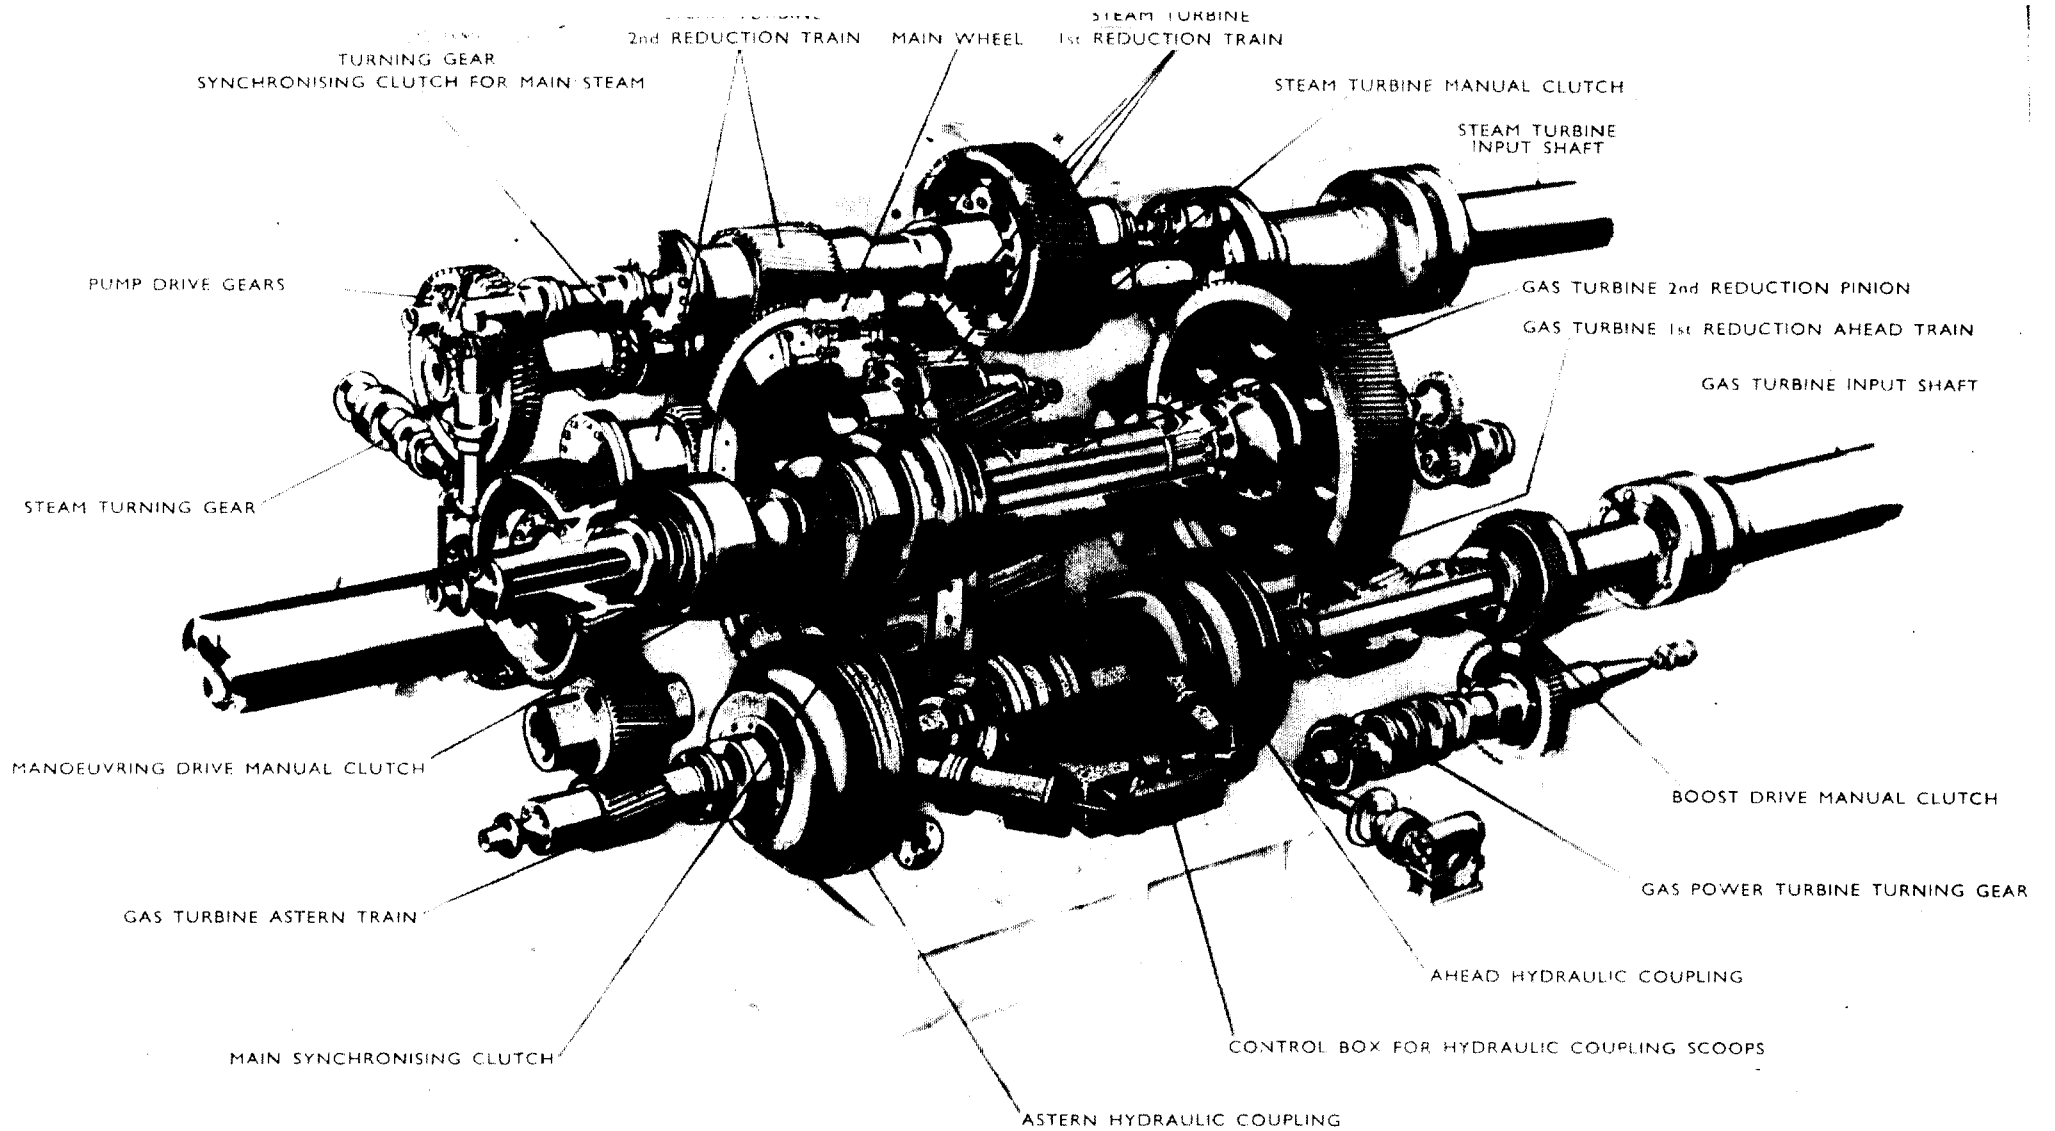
SECTION OF GEARBOX—H.M.S. 'ASHANTI'
